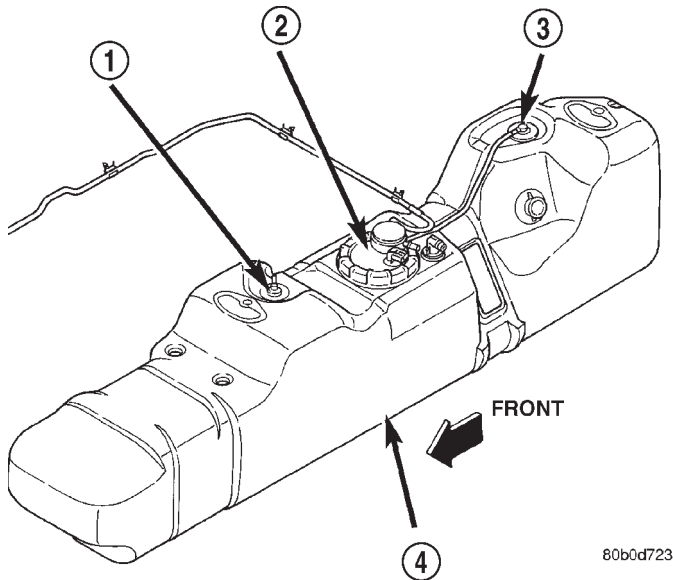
Check Valve Locations - Gas Powered with 35 Gallon Tank
